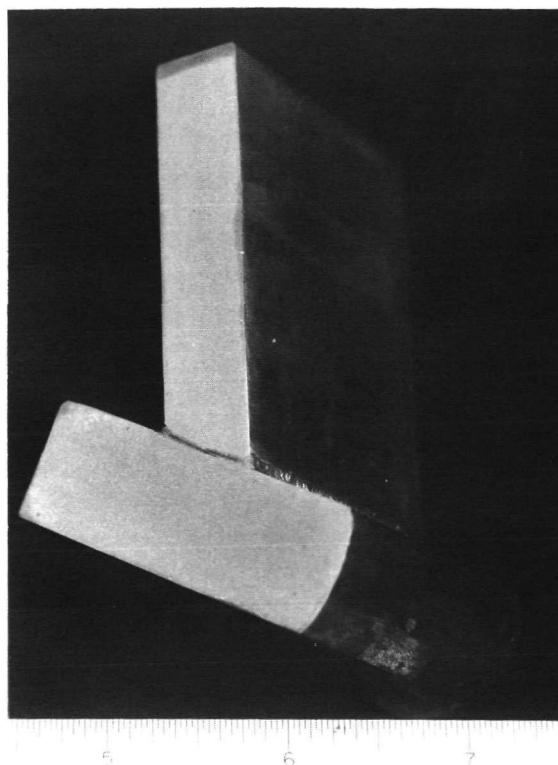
Monel K-500 weldment made by electron-beam welding.
